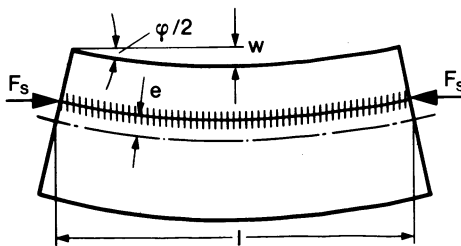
Bending shrinkage of beam caused by eccentric longitudinal weld
